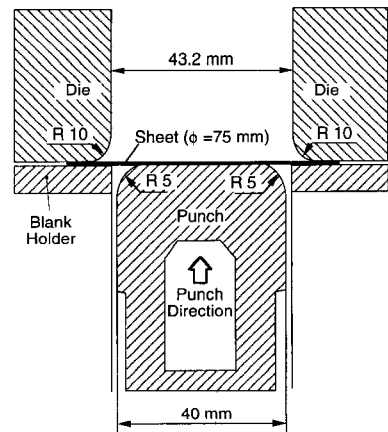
Tooling geometry for cylindrical cup drawing operations
